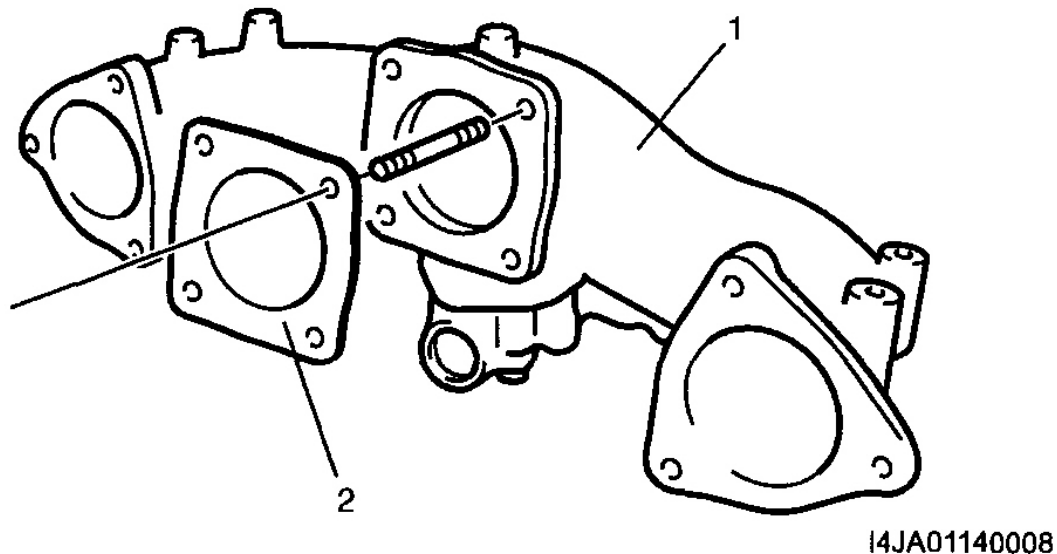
Installing Throttle Body Gasket To Intake Collector
